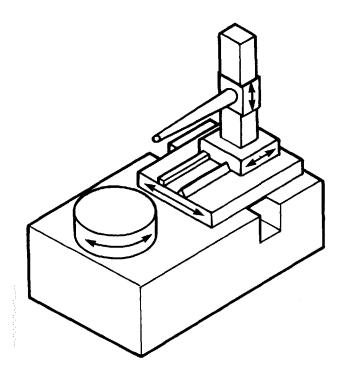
FIXED TABLE HORIZONTAL ARM COORDINATE MEASURING MACHINE
